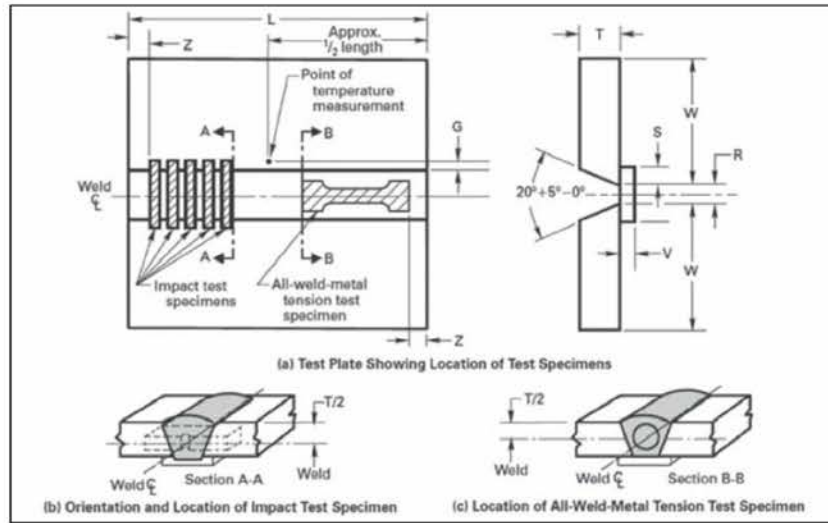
Groove weld test assembly for mechanical properties and soundness of weld metal.
